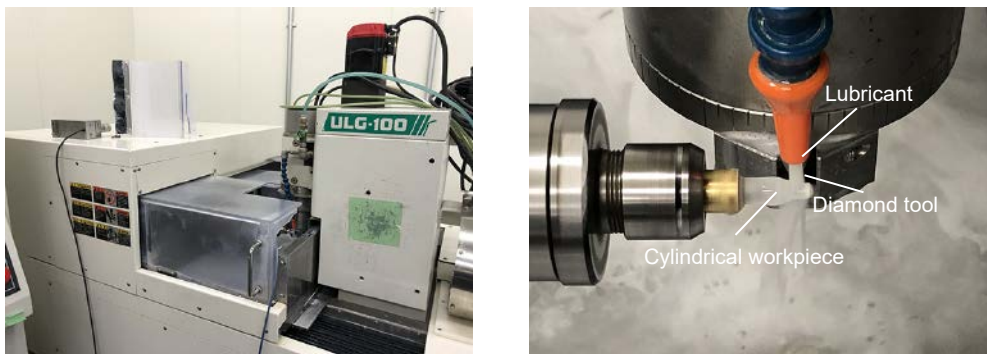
Ultra-precision aspheric surface machine for cylindrical turning. A single crystal workpiece is fixed to a brass jig, and mounted on a vacuum chuck. Lubricant oil is used for manufacturing the microresonator.
